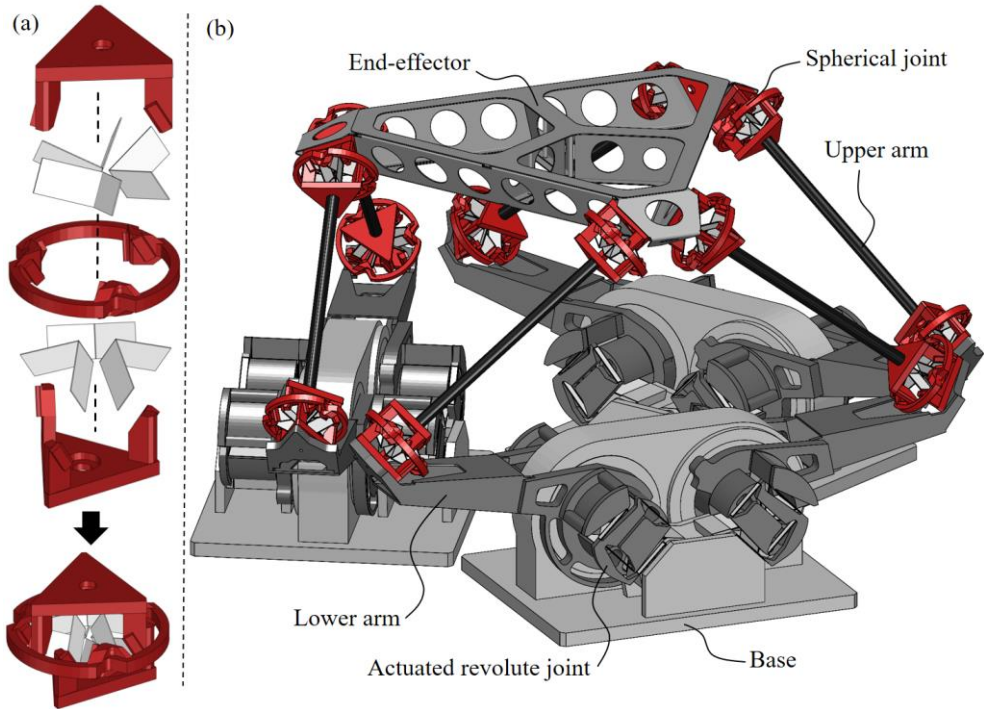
a) Spherical flexure joint, containing two sets of three folded flexures and three frame parts. b) T-flex, manipulator with six identical arms, each arm containing two spherical flexure joints and an actuated revolute joint.
